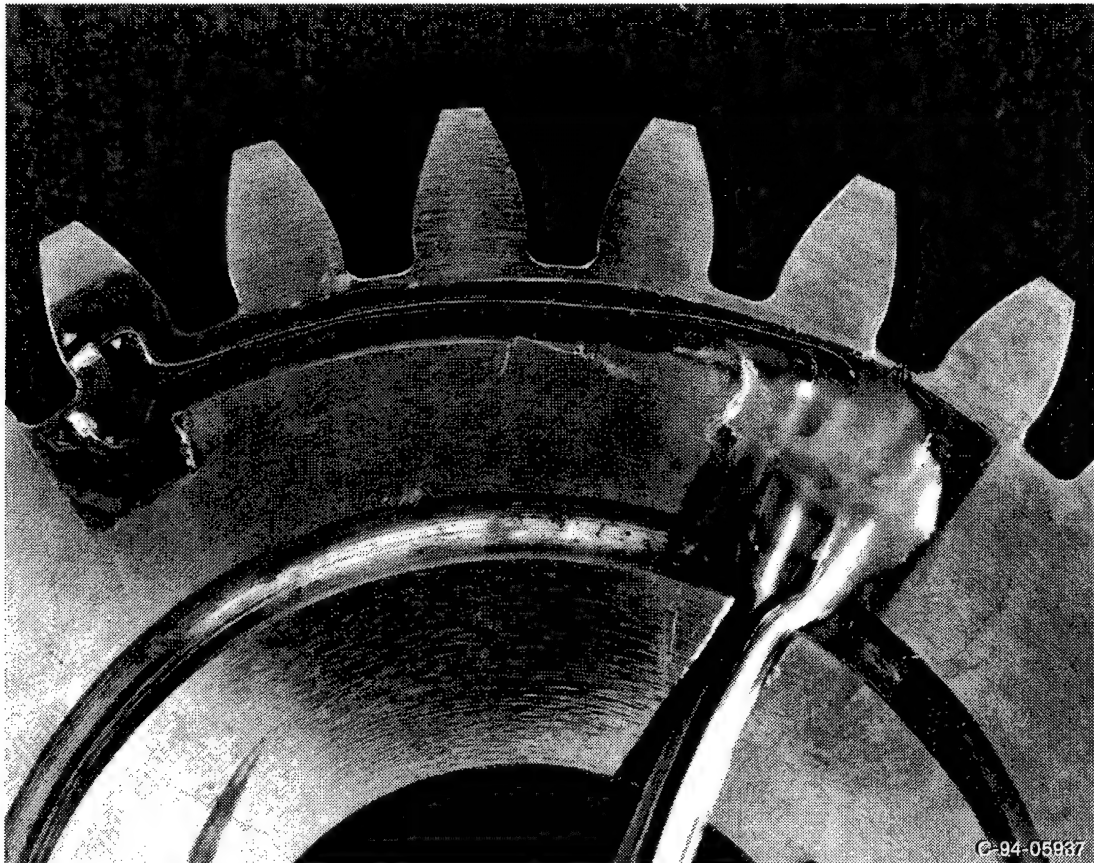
Installation of crack propagation gage on test gear.
